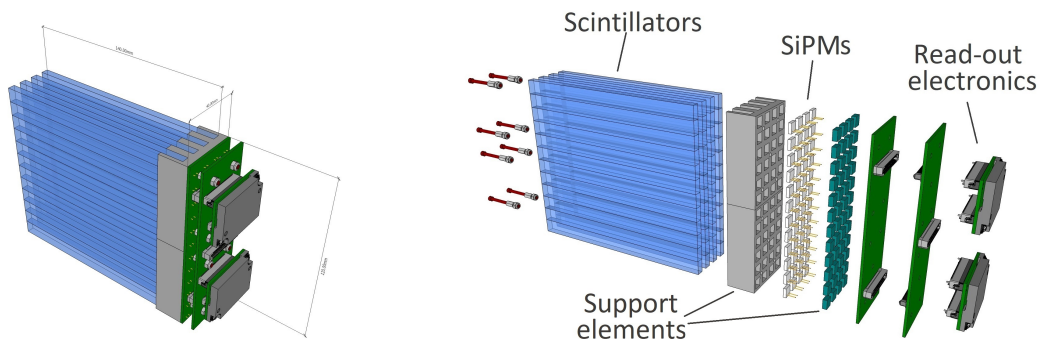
3D rendering of a iPACT calorimeter single module, assembled (left) and exploded view (right).
